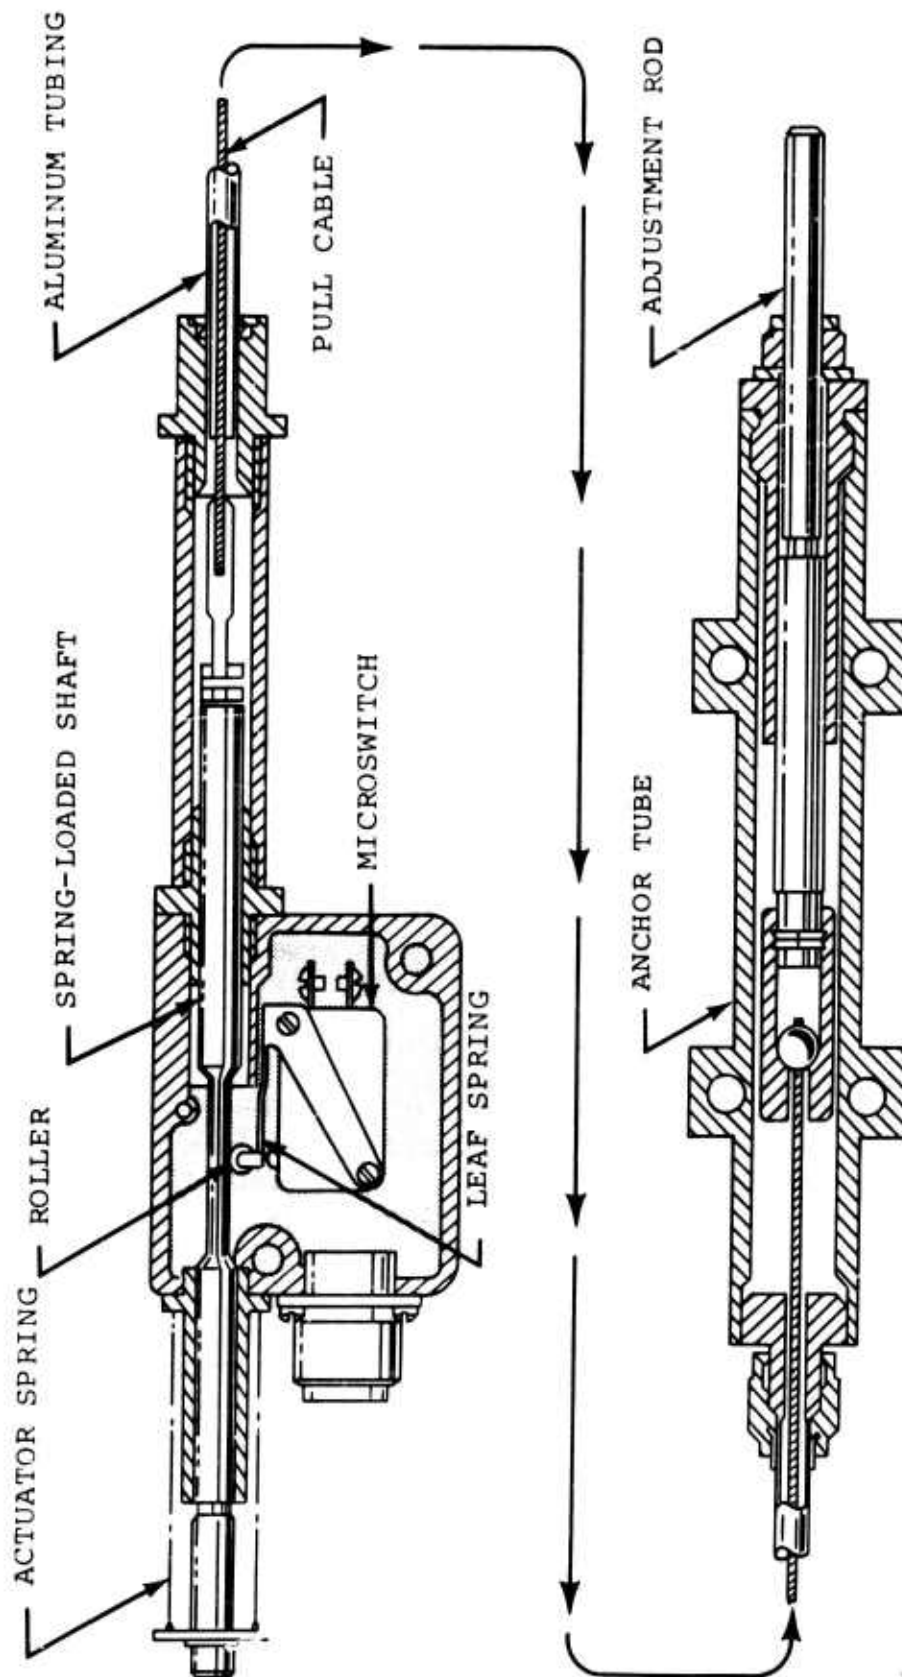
Cable-Type Deformation Switch Schematic (Reference 3).
